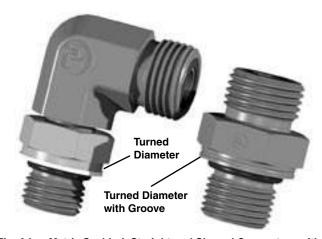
Metric Seal-Lok Straight and Shaped Connectors with Identification for use with ISO 6149-1 Port
